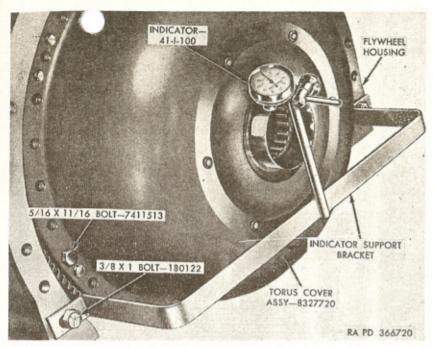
Checking torus cover collar runout using test indicator and indicator support bracket—7950331.
